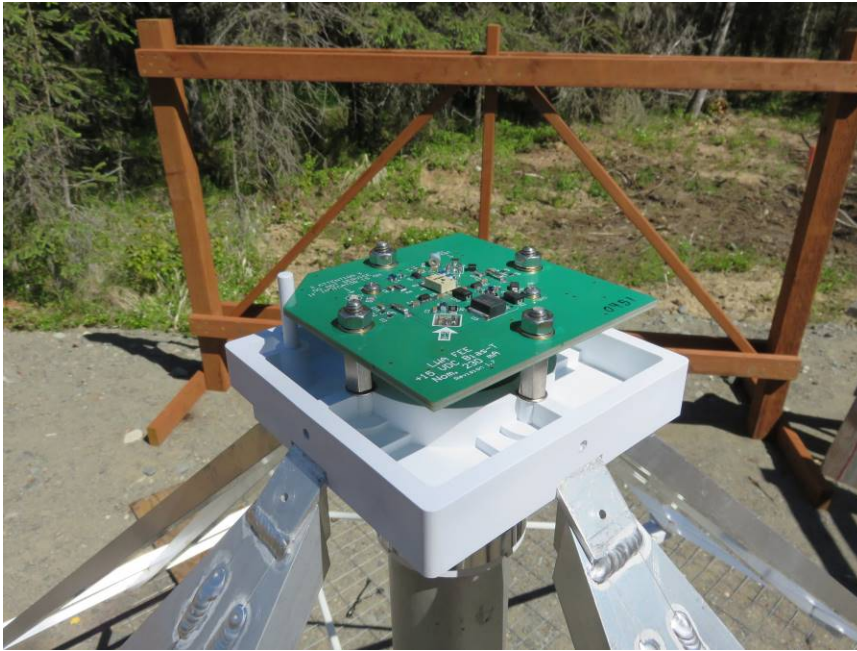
~ FEE assembly fastened to the four coupling nuts. Note the alignment pin near the left corner of the hub baseplate, which ensures the PCB is properly oriented. Not seen are the two coaxial cables that have been connected at the bottom of the PCB assembly before it was fastened down. As noted previously, only one PCB has a power indicating LED and it is placed facing up. The thick hub baseplate mechanically decouples the antenna elements from the FEE to prevent damage from wind and thermal cycling. Image © 2017 W. Reeve
